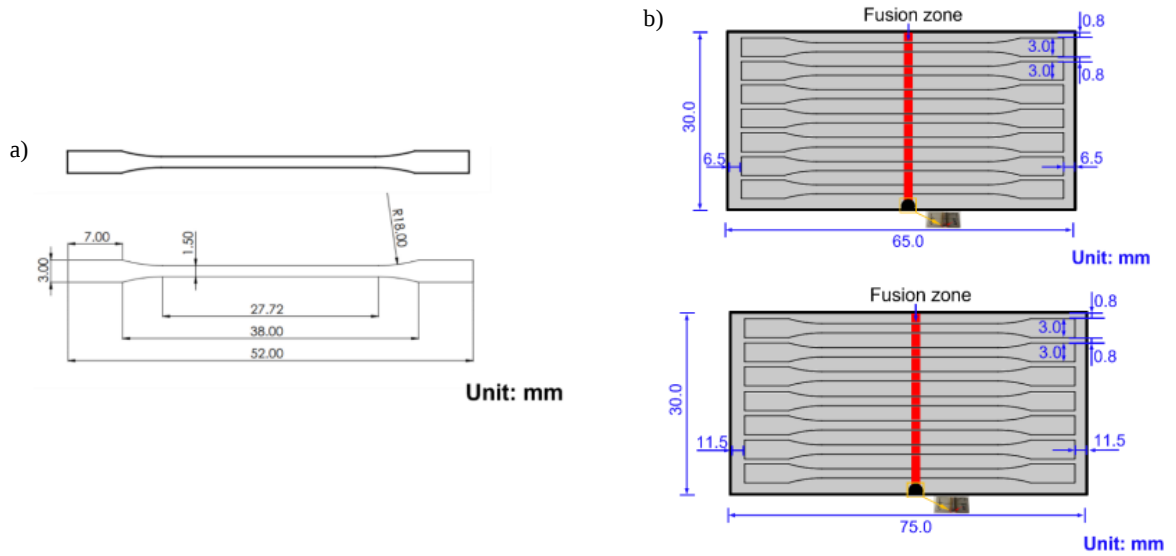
(a) Dog-bone dimensions for the as-rolled and as-annealed samples; (b) Sheet and dog-bone dimensions for the as-rolled and as-annealed samples
